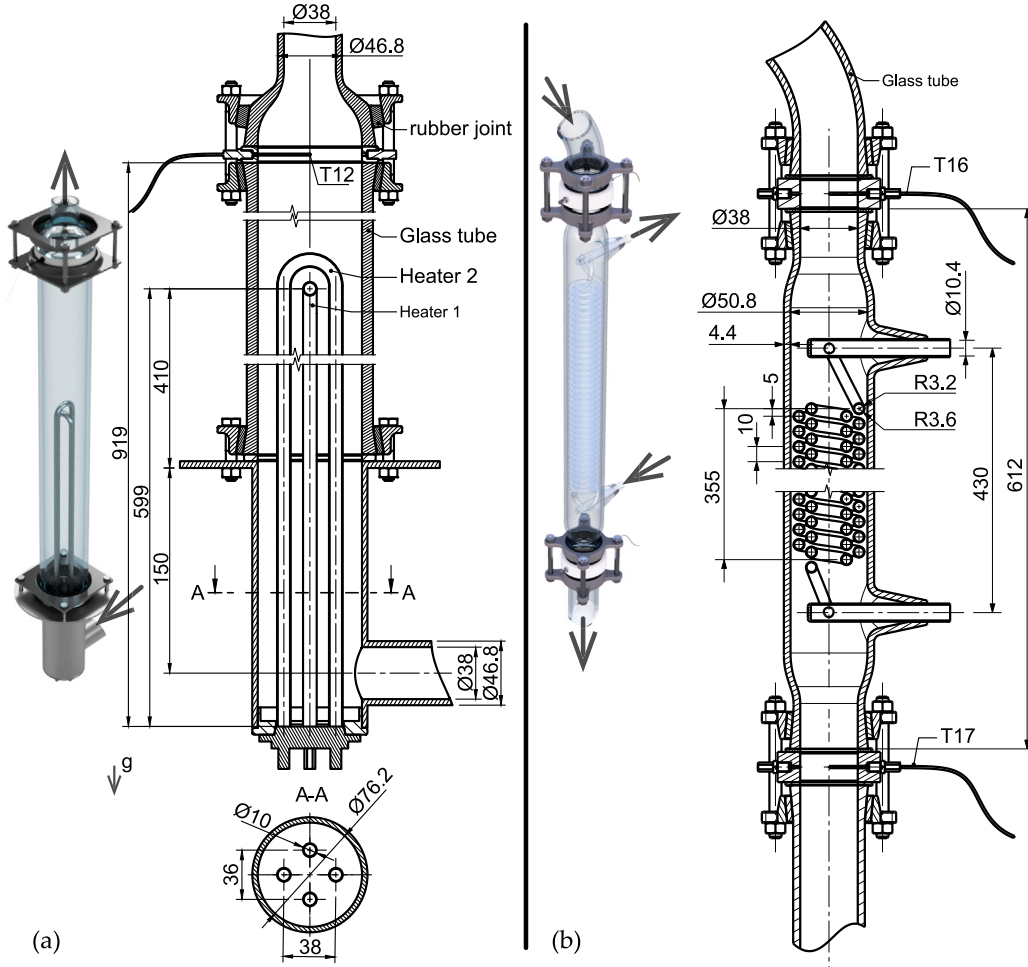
Detail view of the main elements of the NCL, with dimensions in millimeters: (a) U-shaped electrical heaters; and (b) counterflow heat exchanger with shell and helical tubes.
